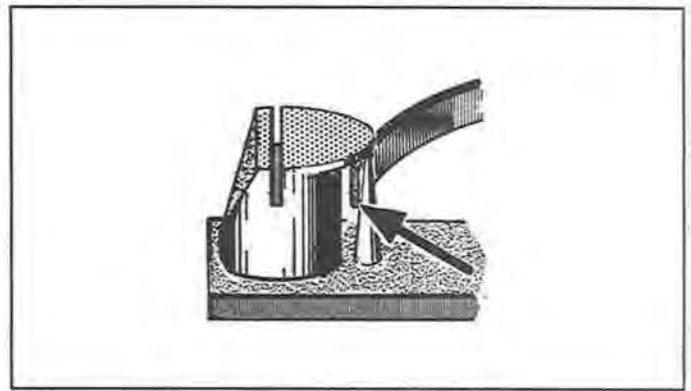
A tapered pin will cause a slight shimmying of the hairspring as only the bottom edge of spring touches regulator pin.
